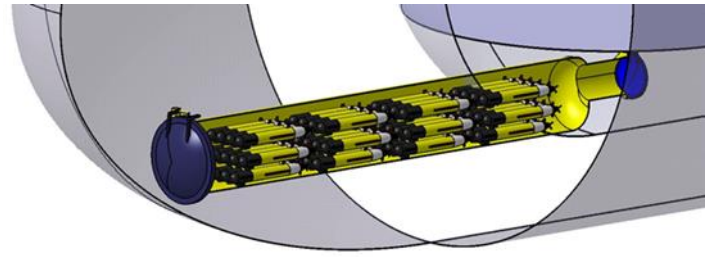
Position of 48 REMUS100 in the bow horizontal large tube
